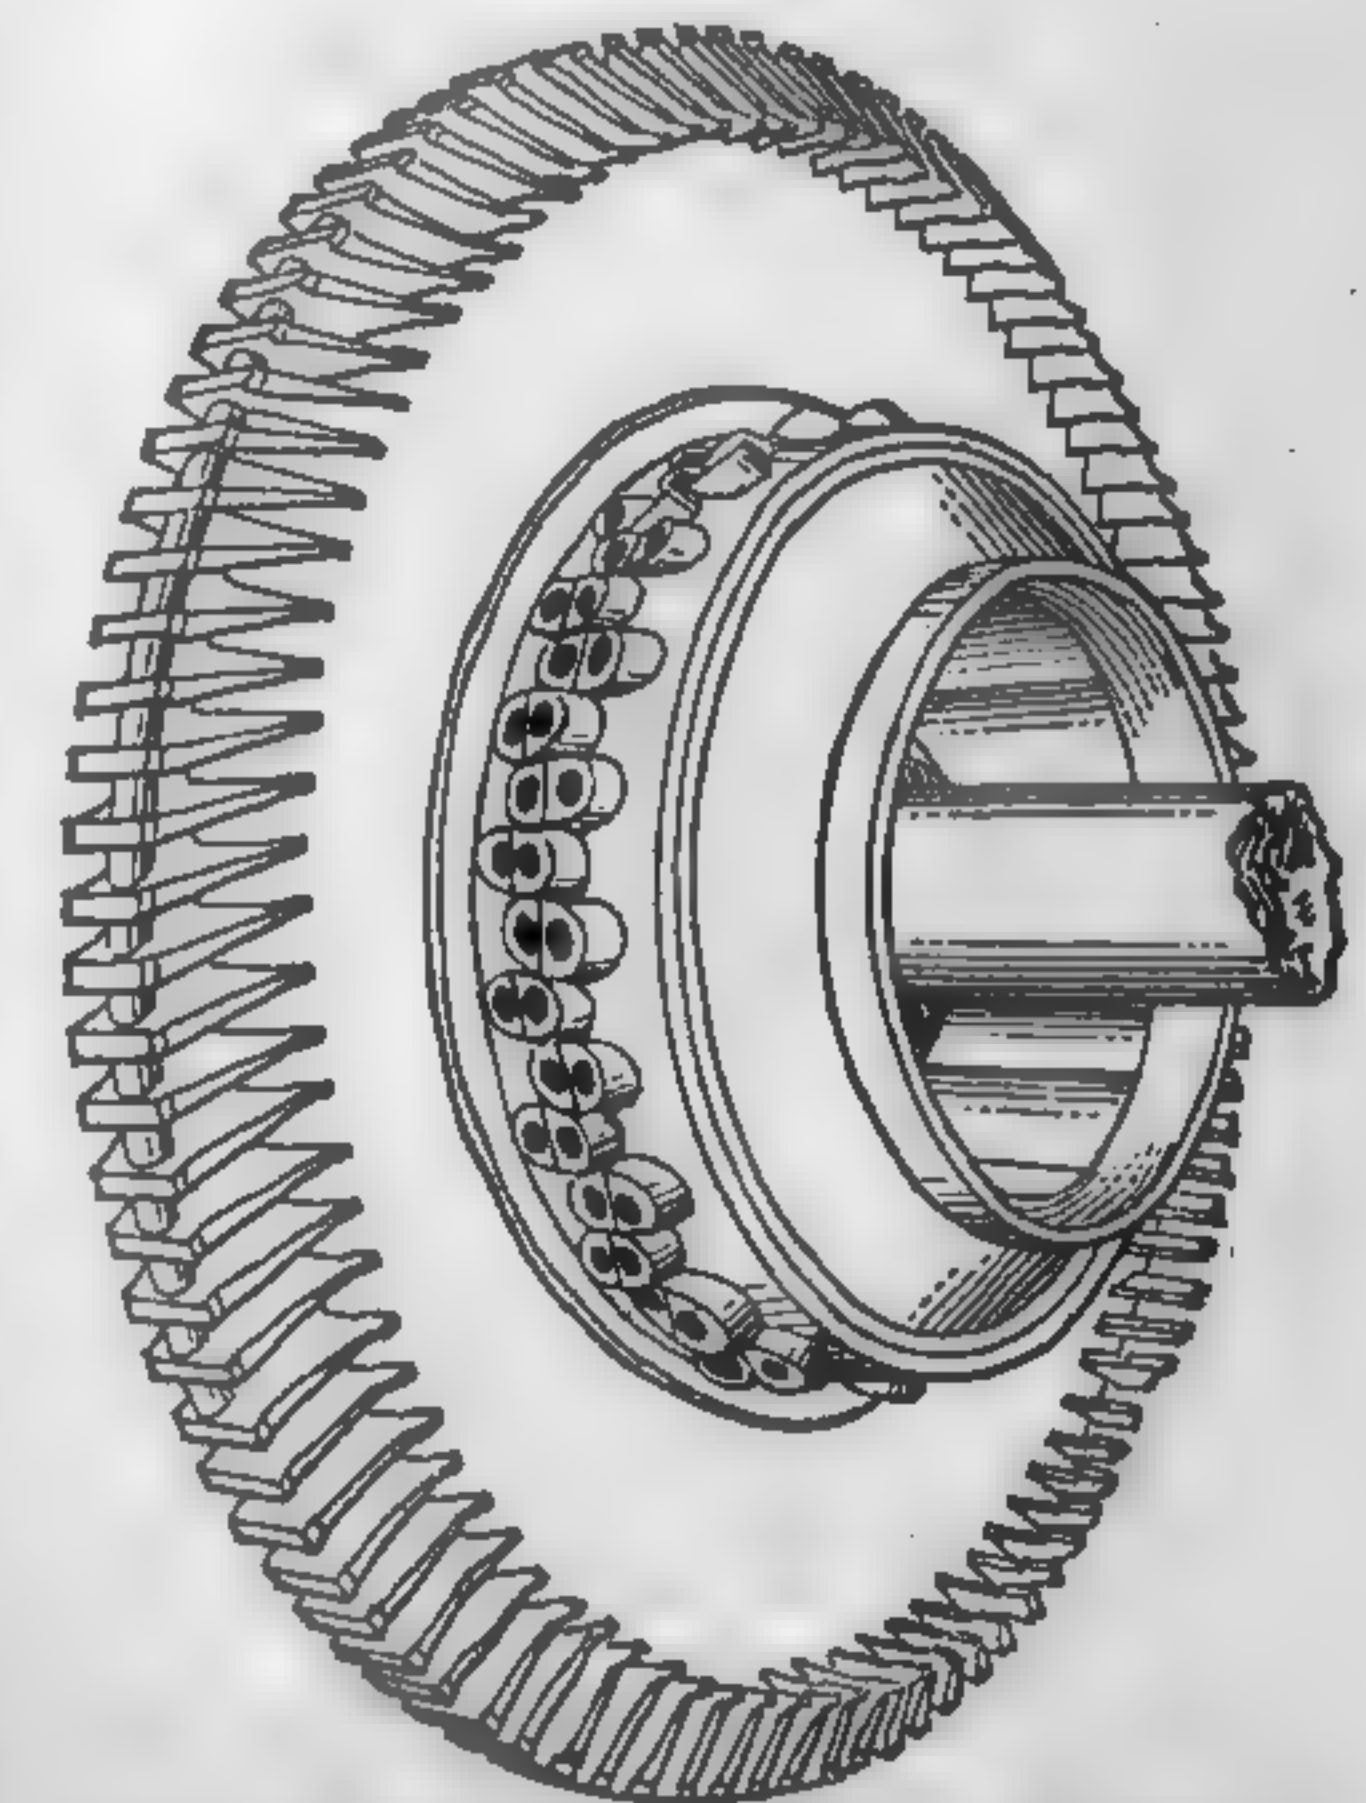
Impeller for Rees "Roturbo" Jet Condenser Pump.
